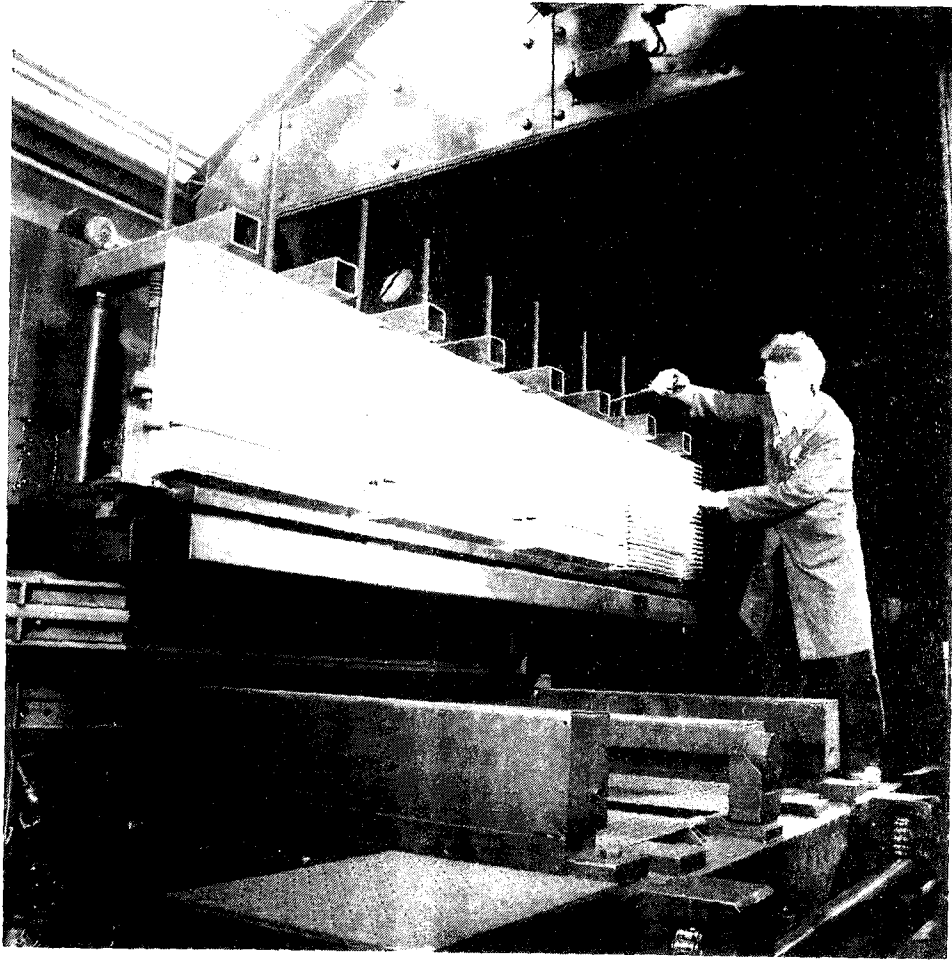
Multiple loading of aluminium heat sinks for EB welding
